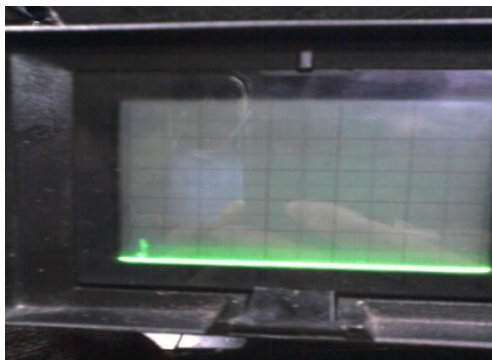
Lack of penetration for weld joint welded by wet electrode rods.
